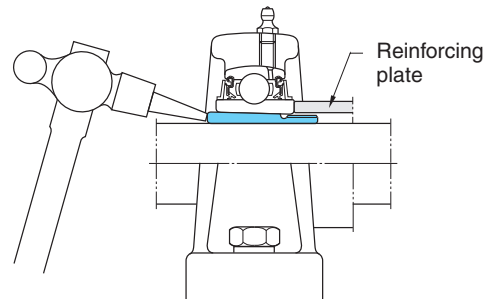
Fitting adapter sleeve to bearing with tapered bore
